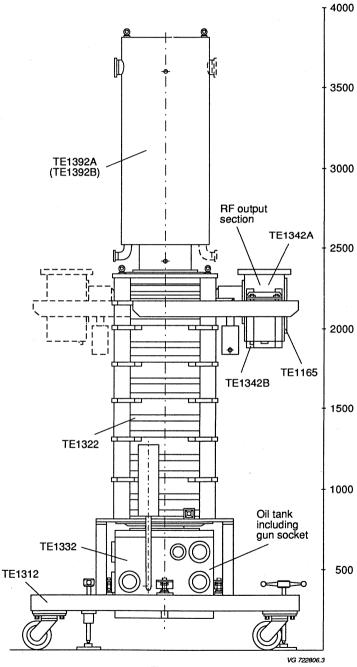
Drawing shows klystron and trolley without operational lead-shielding.
